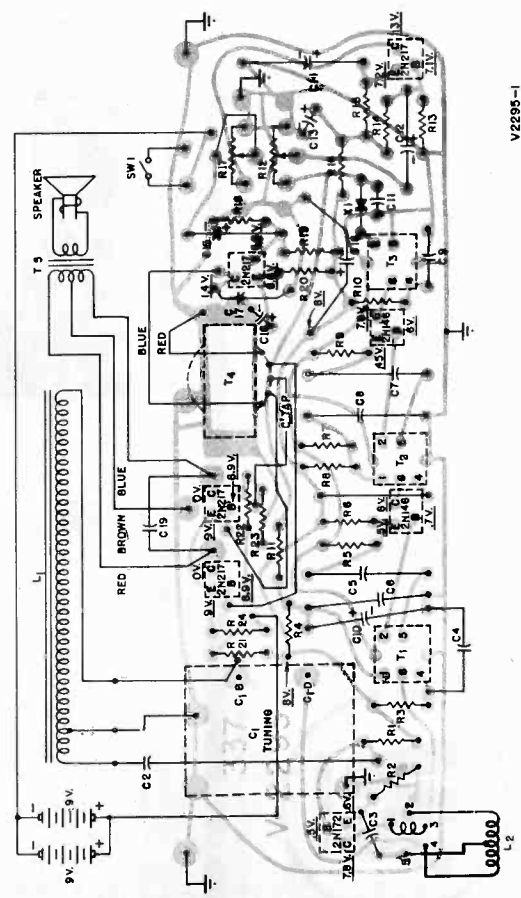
Bottom View of Printed Board Showing Top Components Symbolically
